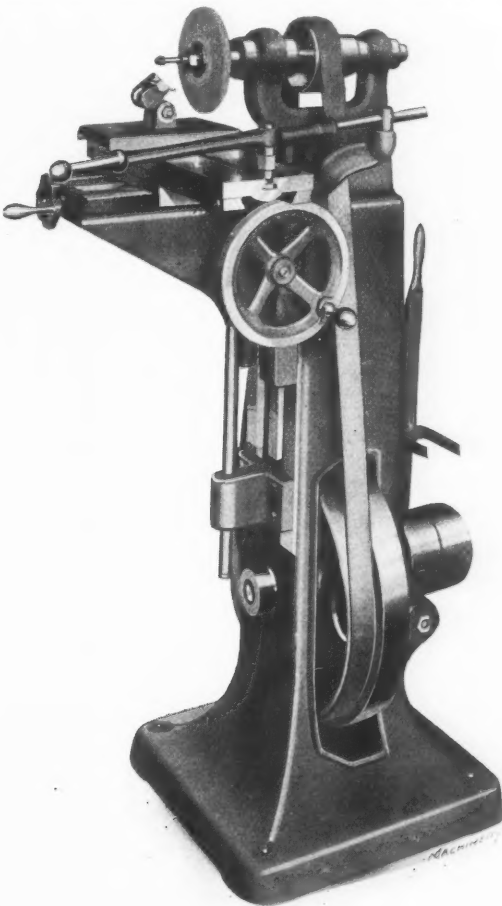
Special Grinding Machine for sharpening Chasers of Threading Dies
